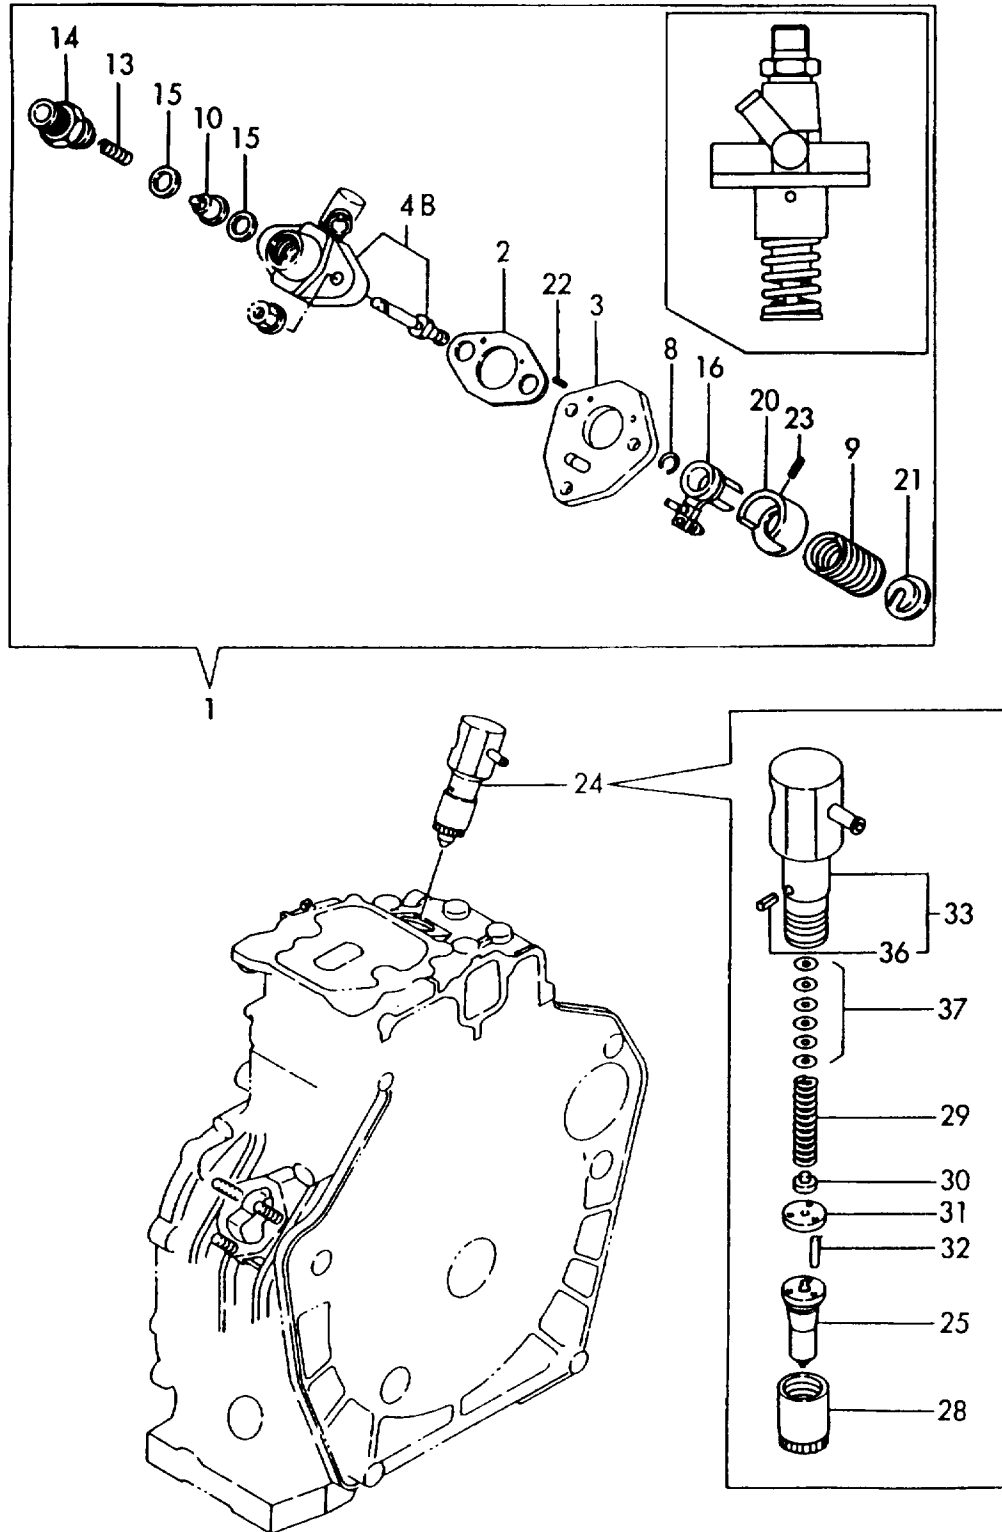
FUEL INJECTION PUMP AND VALVE
